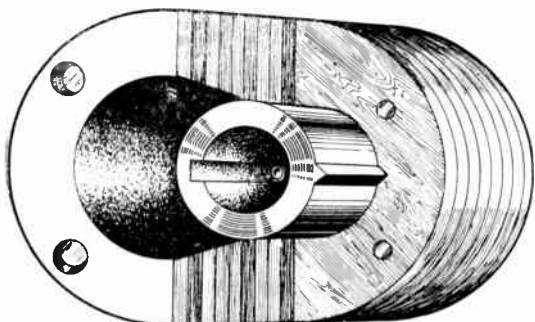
SECTION OF WOOD MOTOR PULLEY WITH IRON BUSH FORCED IN.
